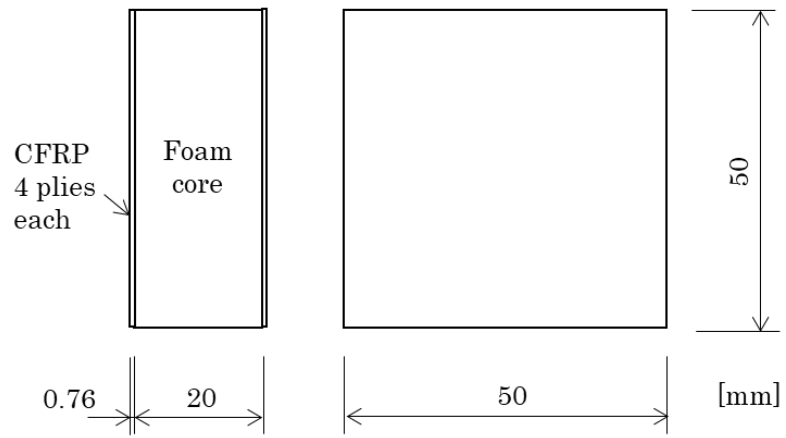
Dimensions of flatwise tensile test specimen
